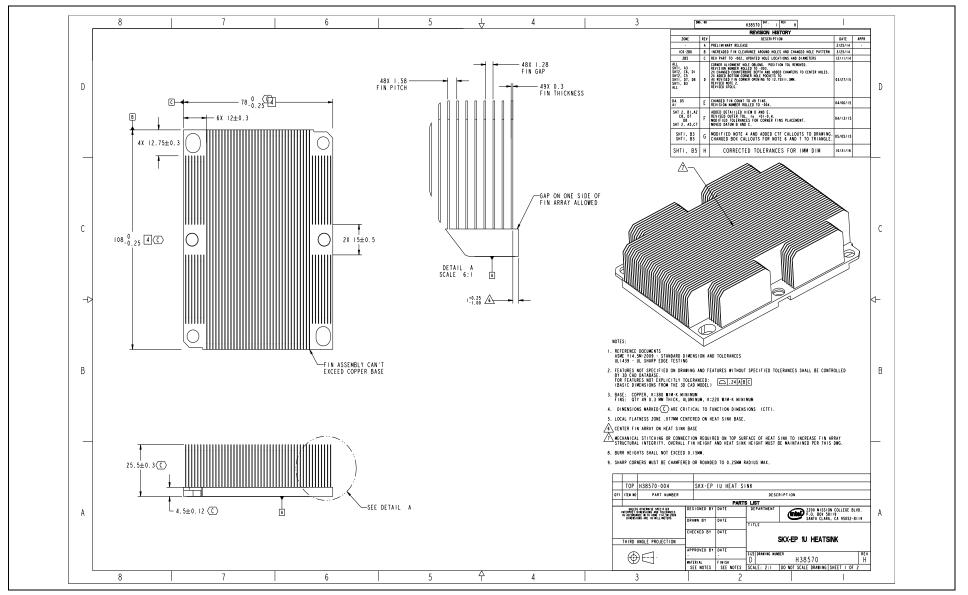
1U Heatsink (Sheet 1 of 2)
